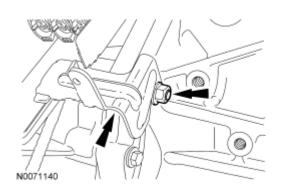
Locating Output Shaft Speed Sensor Electrical Connector Courtesy of FORD MOTOR CO.
